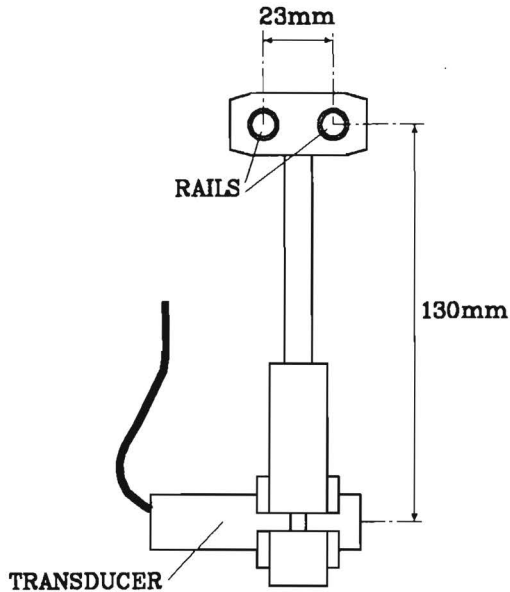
Schematic drawing of a transducer carrier (side view) with some essential dimensions.
